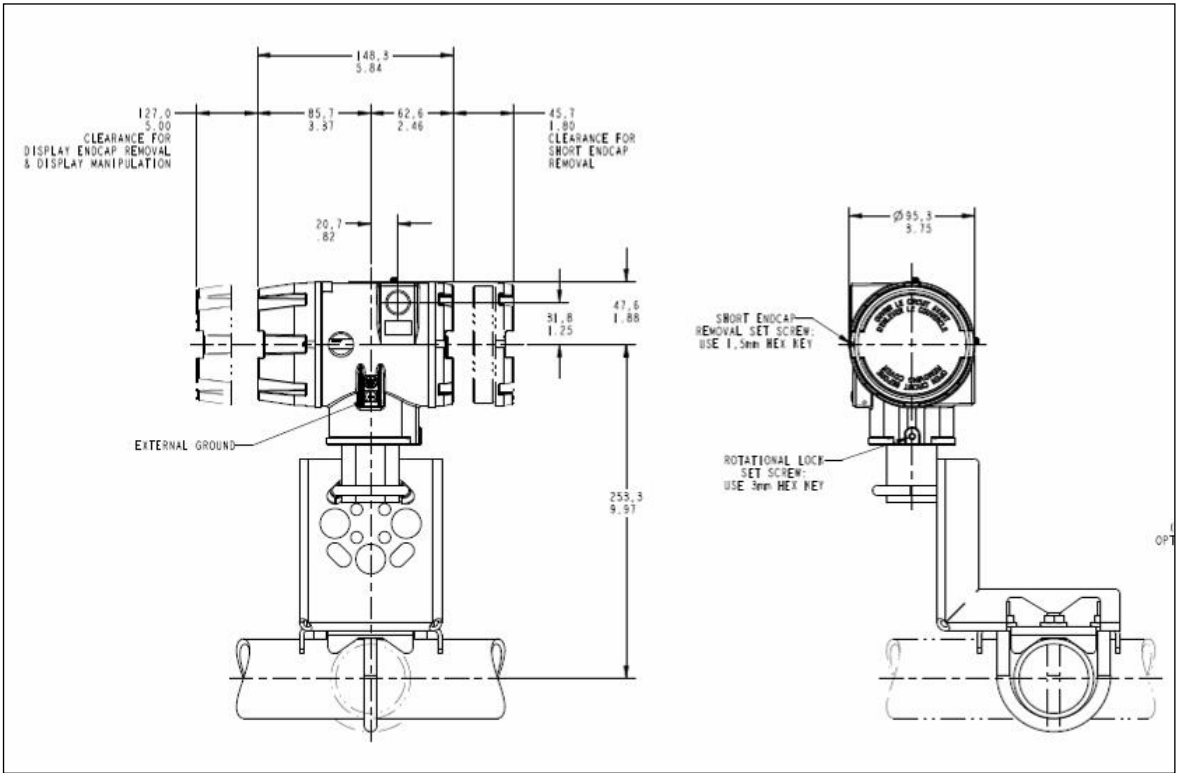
SmartCET horizontal pipe mount using angle bracket.
